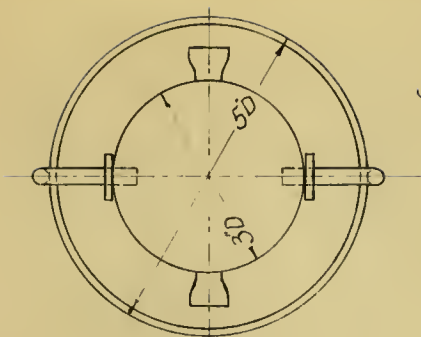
, Plate X gives the dimensions for this problem, and, a perspective view is shown in Fig. 2, Plate X. A hole was drilled through the syrup pail B at the place where the bail had been removed. The longer copper tubes were bent to shape and soldered into the holes (Plate X, Fig. 1). Then two holes were drilled in the center of the
